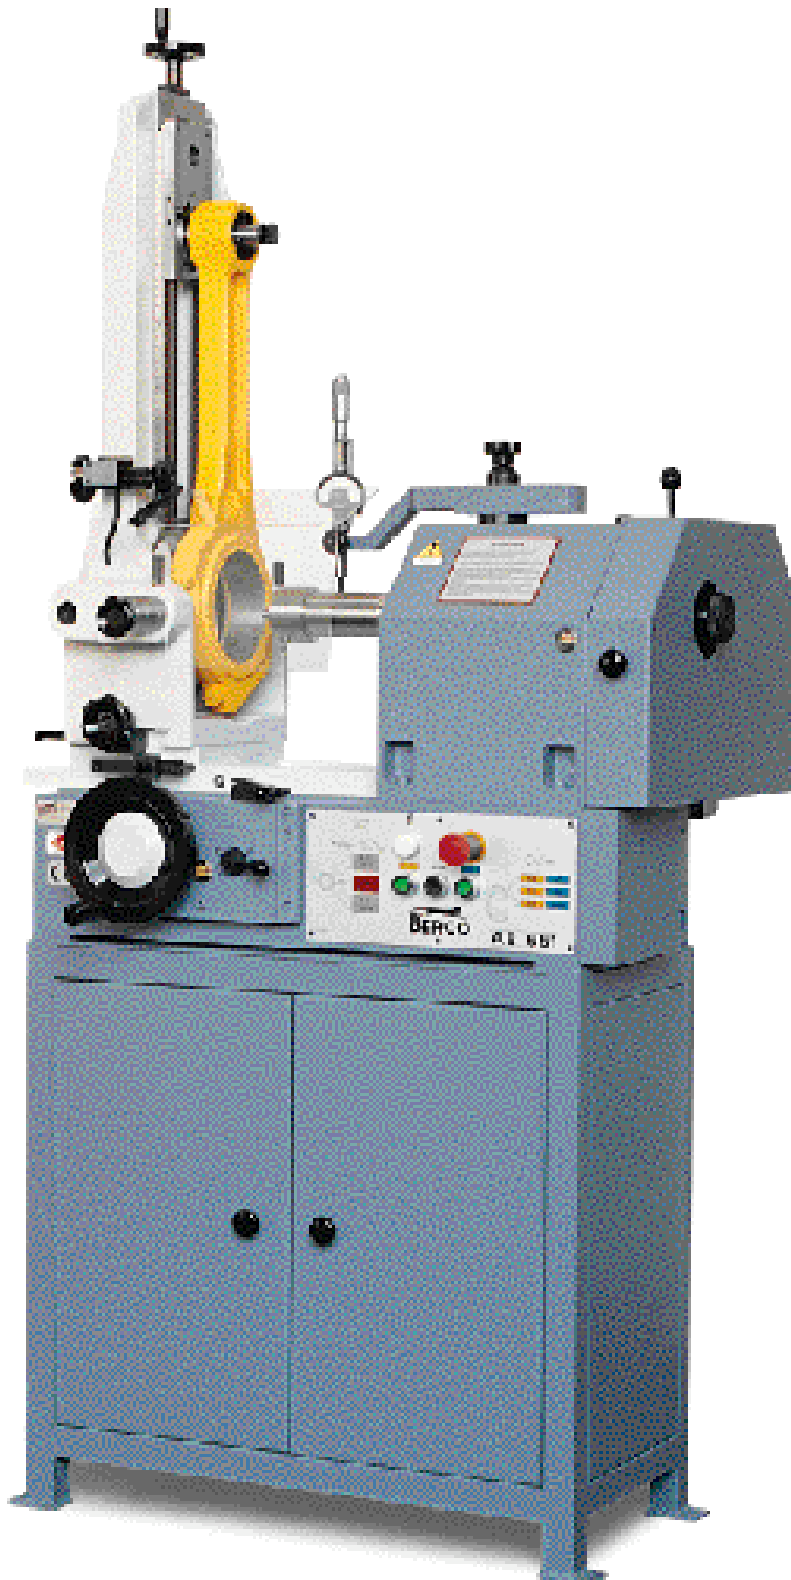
View of AB 651 connecting-rod boring machine setup for machining
